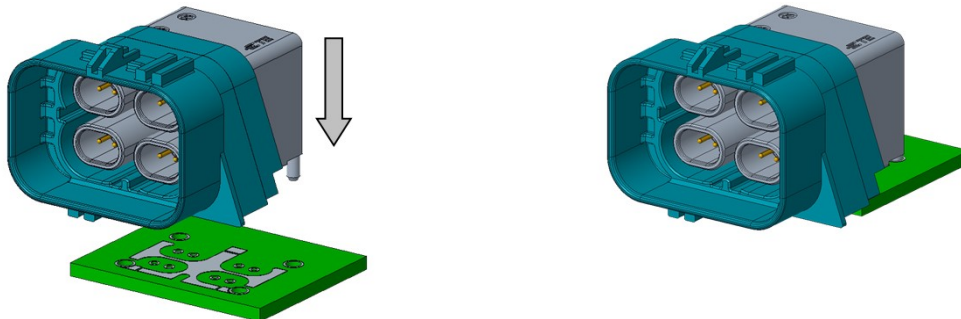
/ Pin Header 4P 90° sealed, TE-No. 2397322
